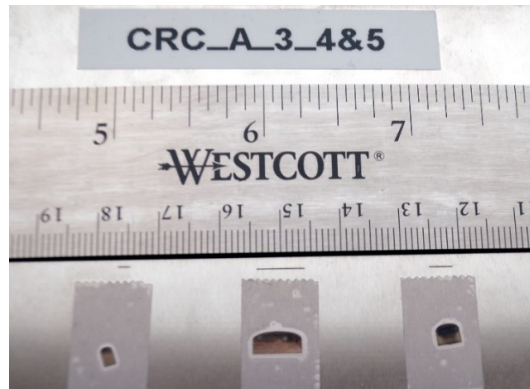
8 mm notch (middle one) in 13mm thick specimen with the EDM cutting tool
